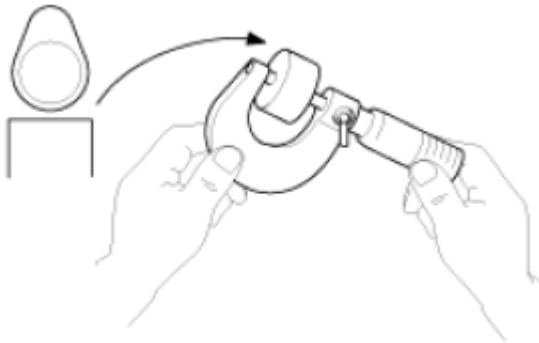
Measuring Thickness Of Tappet Using Micrometer
